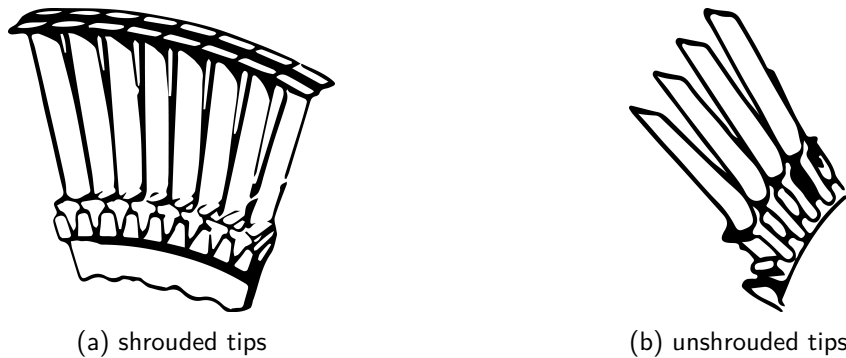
Schematic diagrams of shrouded rotor blades (a) and unshrouded rotor blades (b), adapted from [21, 23]
